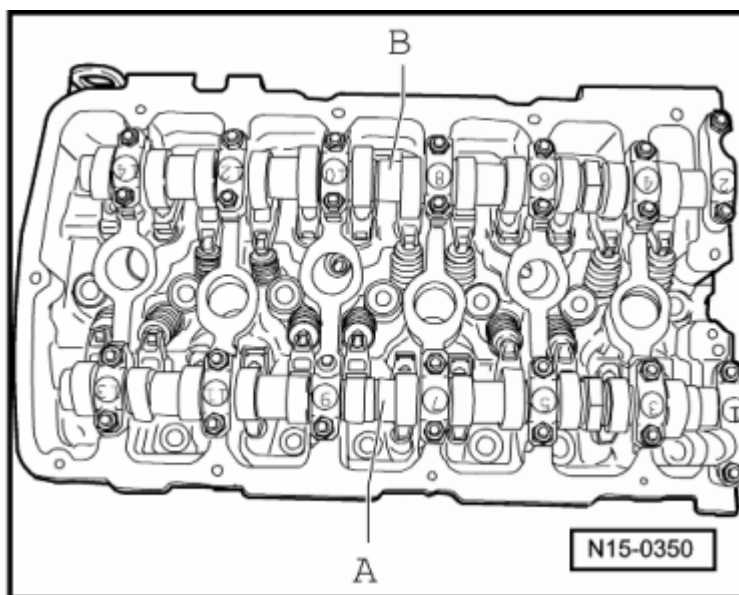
Identifying Intake Camshaft And Exhaust Camshaft
